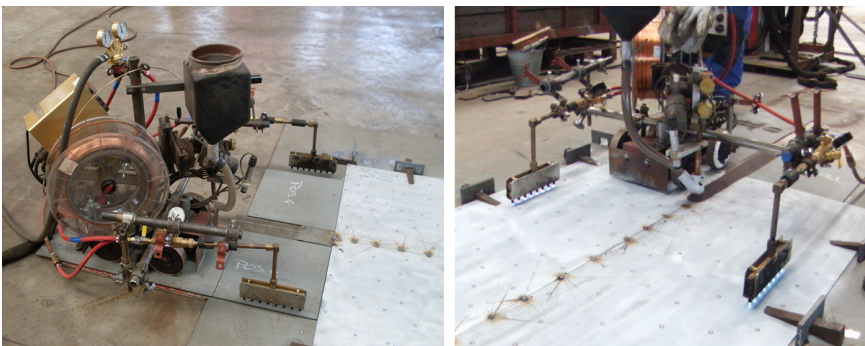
Side heating during welding (test 5 and 6).
